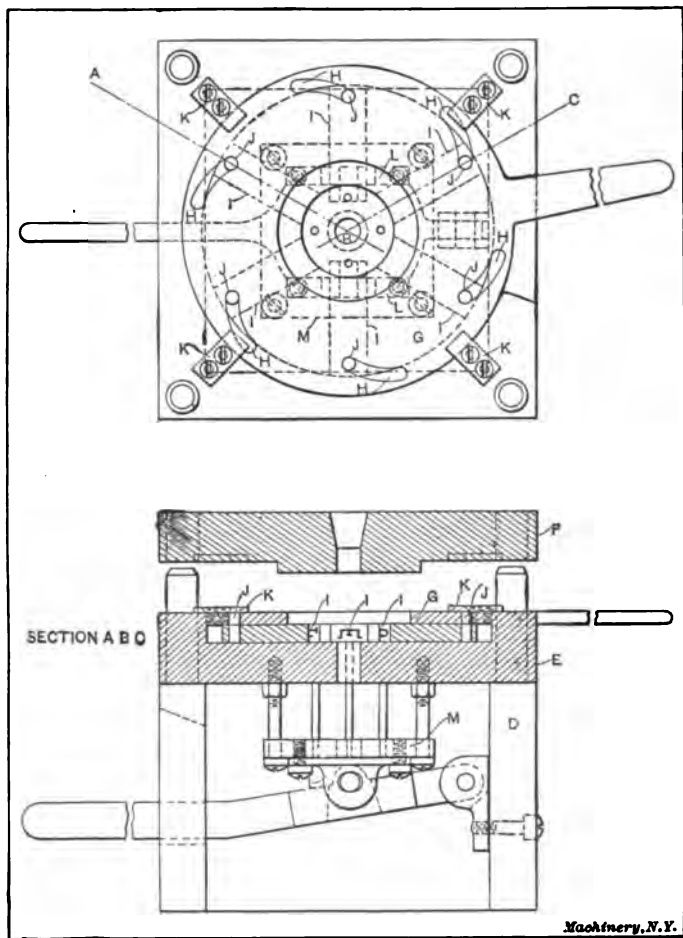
Slide Die for Casting the Printing Wheel shown in Fig. 10
